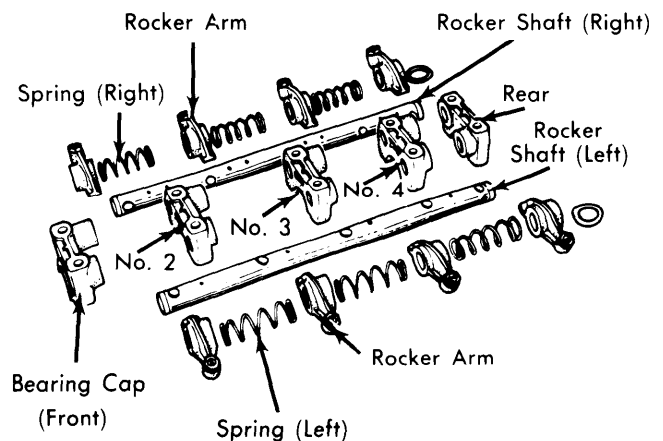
Exploded View of 1600 cc Engine Rocker Arm
